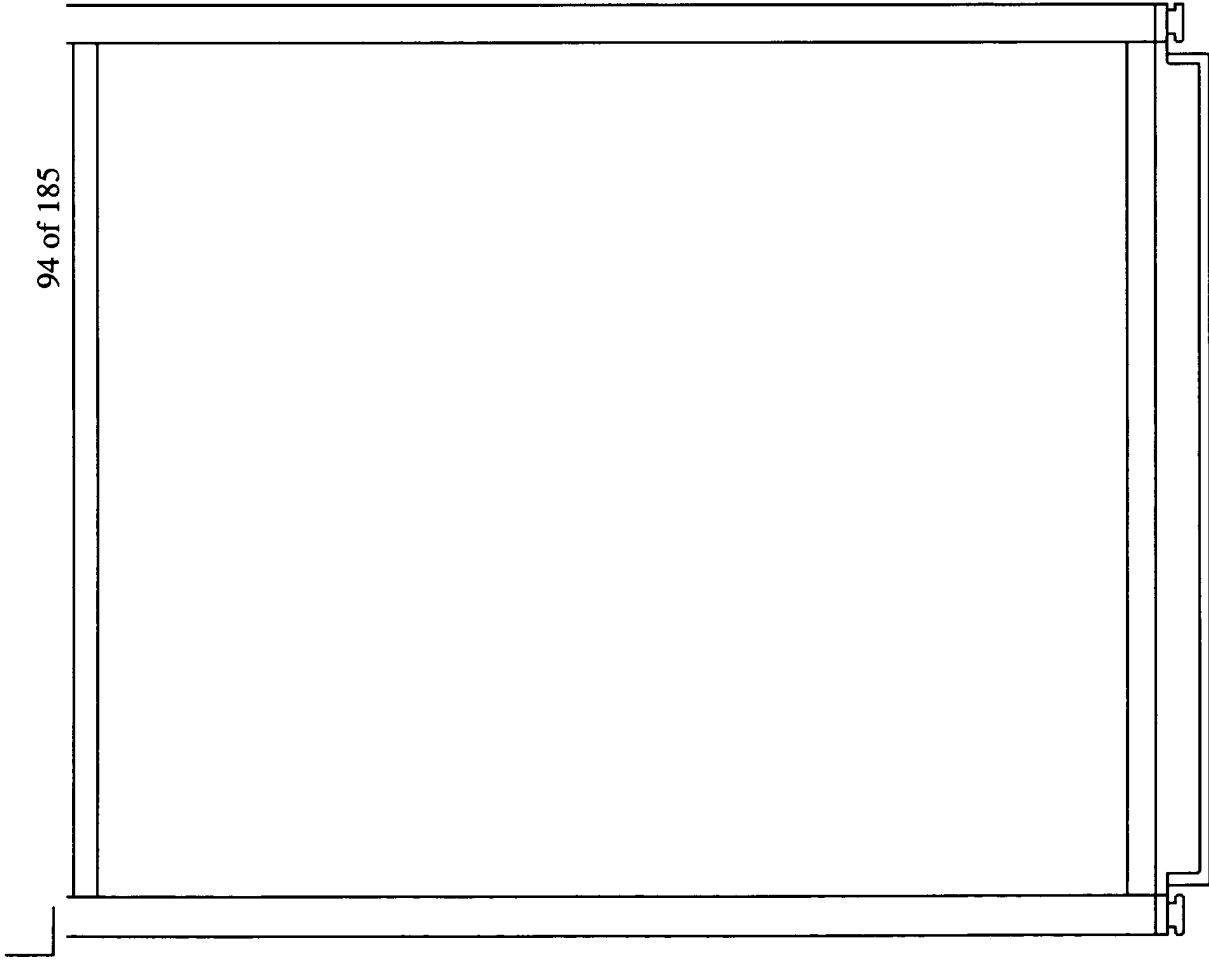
C: Top view of the right end of a ceiling frame (20 foot collapsible cargo container)
